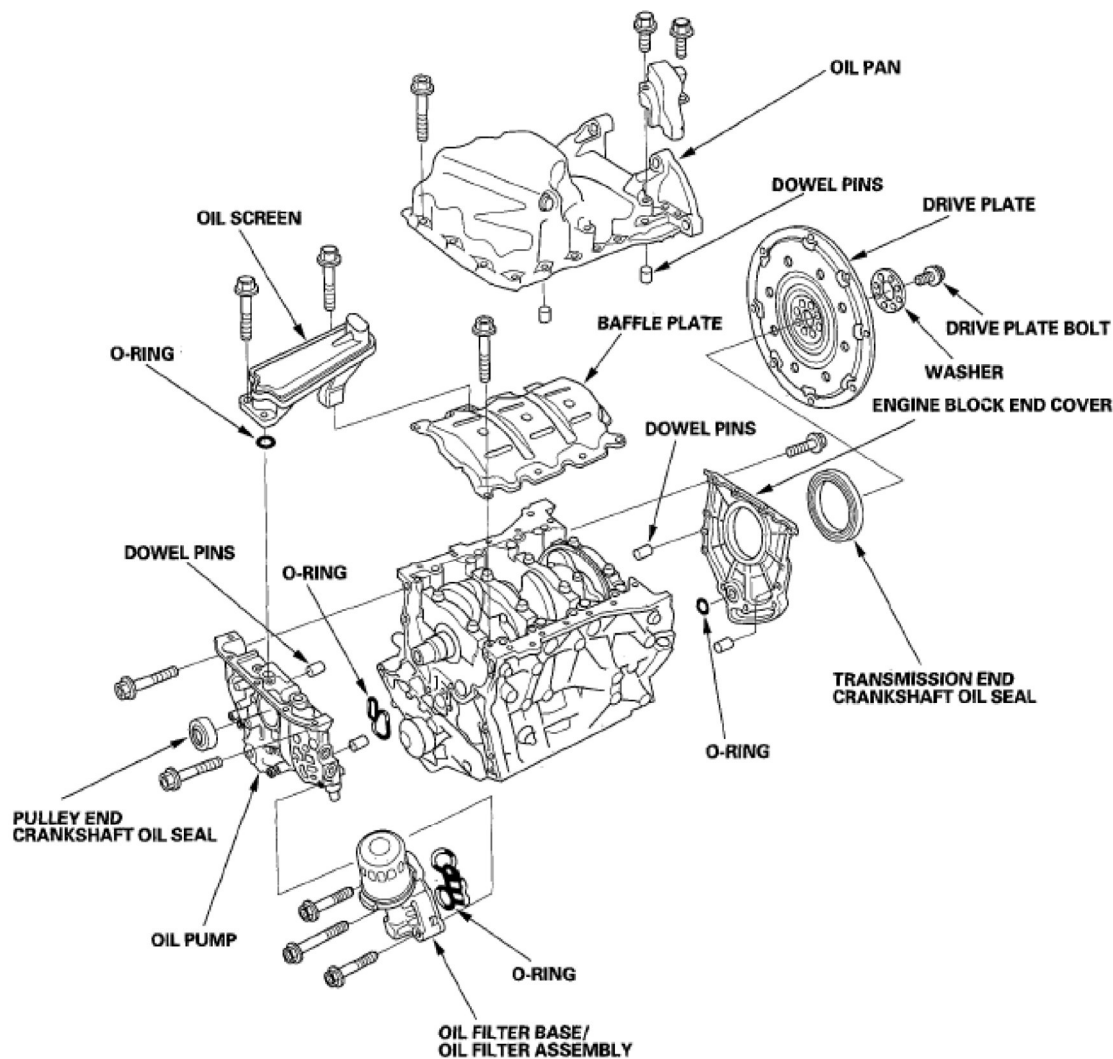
Identifying Engine Block Component Location - '08-09 models J35A7 Engine
